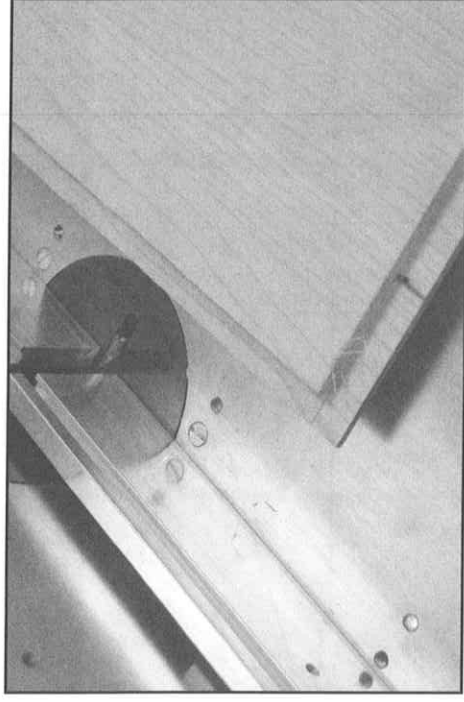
Start by cutting the bottom 1/8" groove. Move the panel from left-to-right cutting end grain cuts first.
